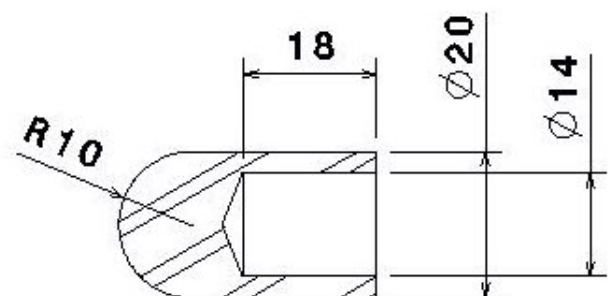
Sketch of the EN-AW 6082 aluminum bullet used in tests
